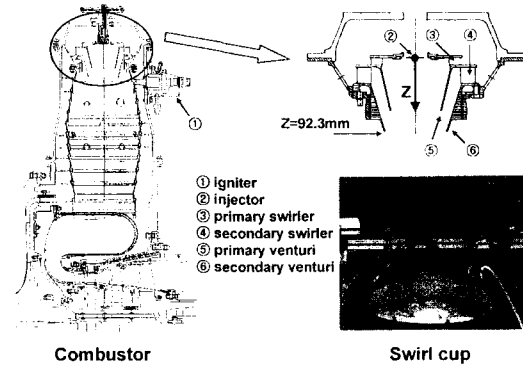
Schematic of gas turbine combustor and swirl cup assembly
